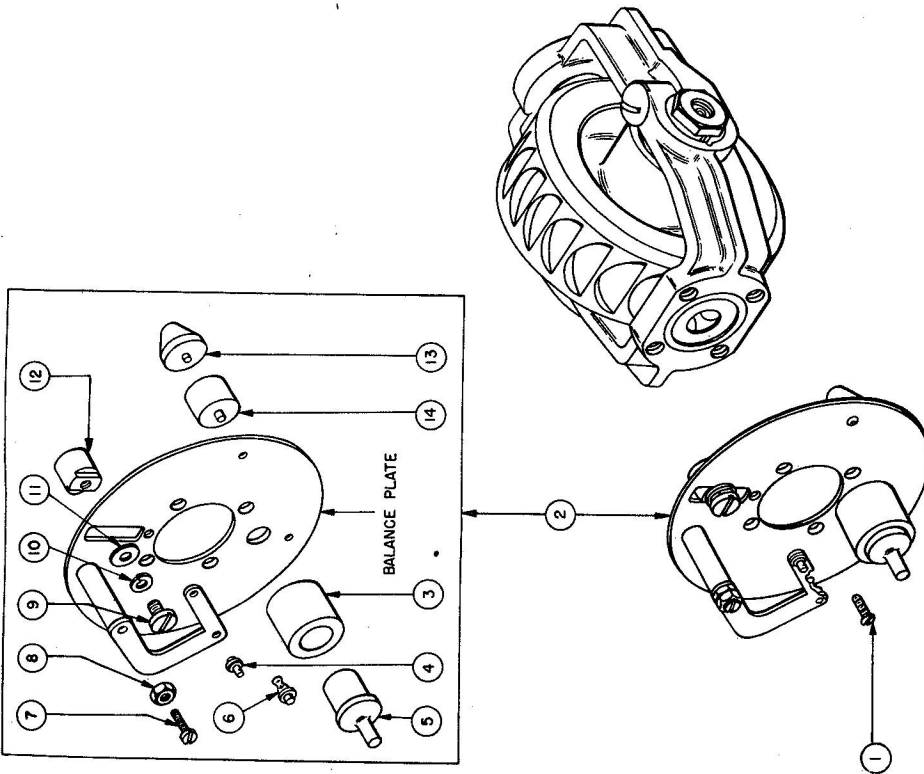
Exploded View Drawing—Mechanism Assembly—Navy Types FSSC 18-I-462 (Pioneer Type 1713-1Y-A1), FSSC 88-I-3280 (Pioneer Type 1719-1AF-A1), and FSSC 88-I-3281 (Pioneer Types 1719-1AN-A1 and 1719-1AQ-A3).
